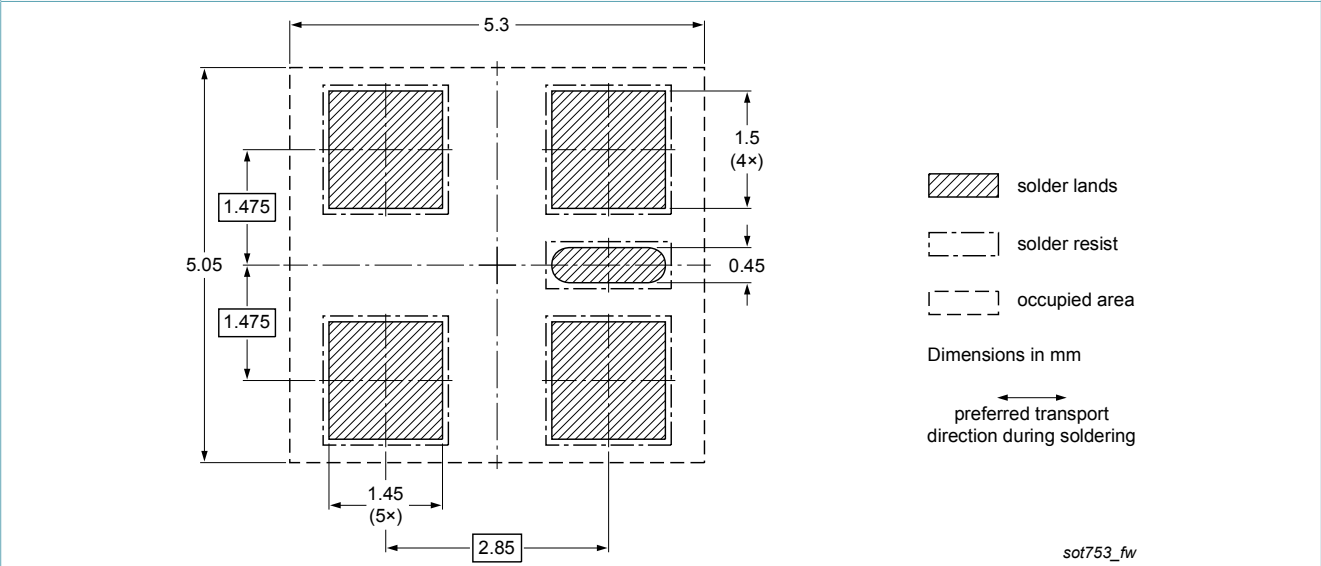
Wave soldering footprint for TSOP5 (SOT753)
